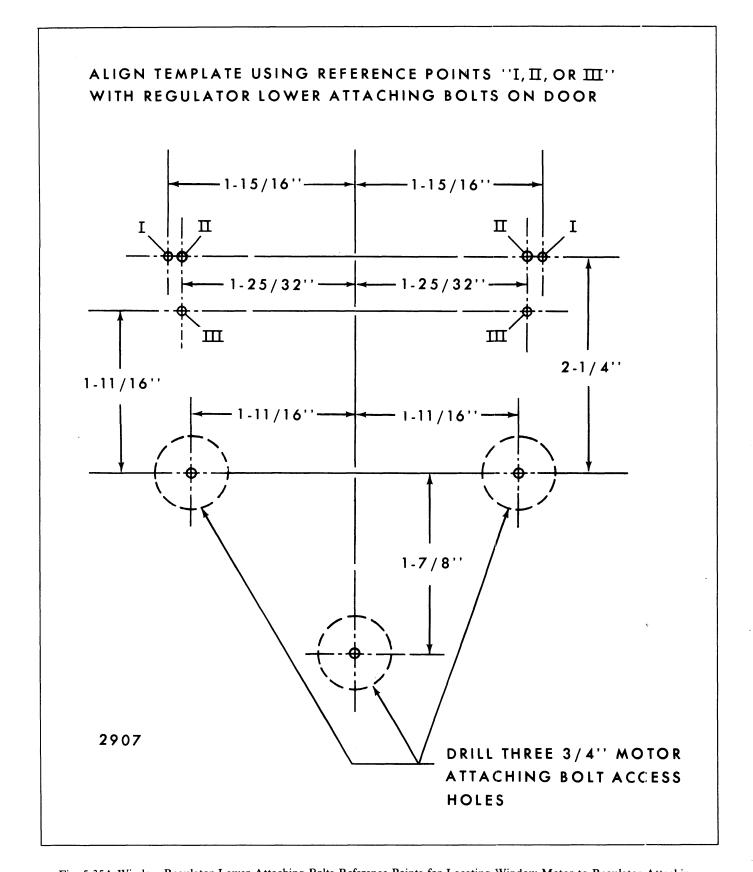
A-Window Regulator Lower Attaching Bolts Reference Points for Locating Window Motor to Regulator Attaching Bolts: "I" for "B, C and E-37, 47, 57 and 67" Style Front Doors; "II" for "C-69" Style Rear Doors; "III" for "B-36, 39, 46 and 69" and "C-49 and 69" Style Front and Rear Doors (Full Page)
